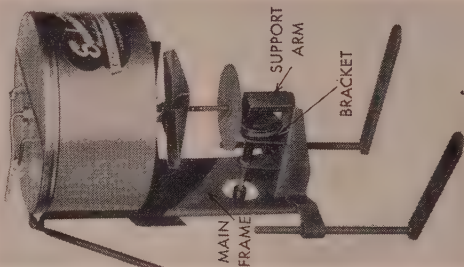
Present Welded Steel Design. Steel members replace cast components, prove to be lighter, but stronger in construction, yet are formed from 12 gauge steel.
